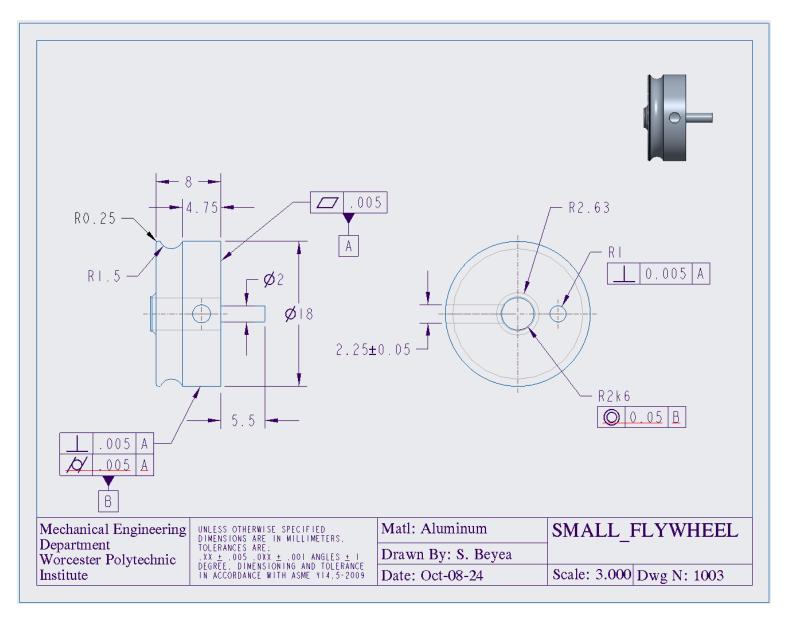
small flywheel which is driven by the displacer piston (hot piston).
